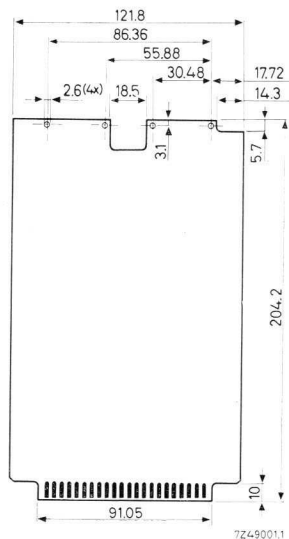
Dimensions of the printed wiring board to fit chassis type 4322 026 38230. Thickness is 1.6 ± 0.2 mm.
